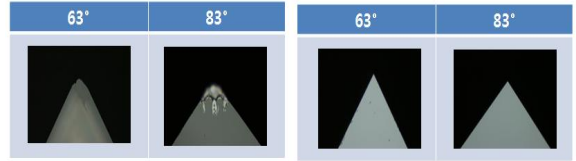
Surface image due to machining depth (improved 2nd experiment)
